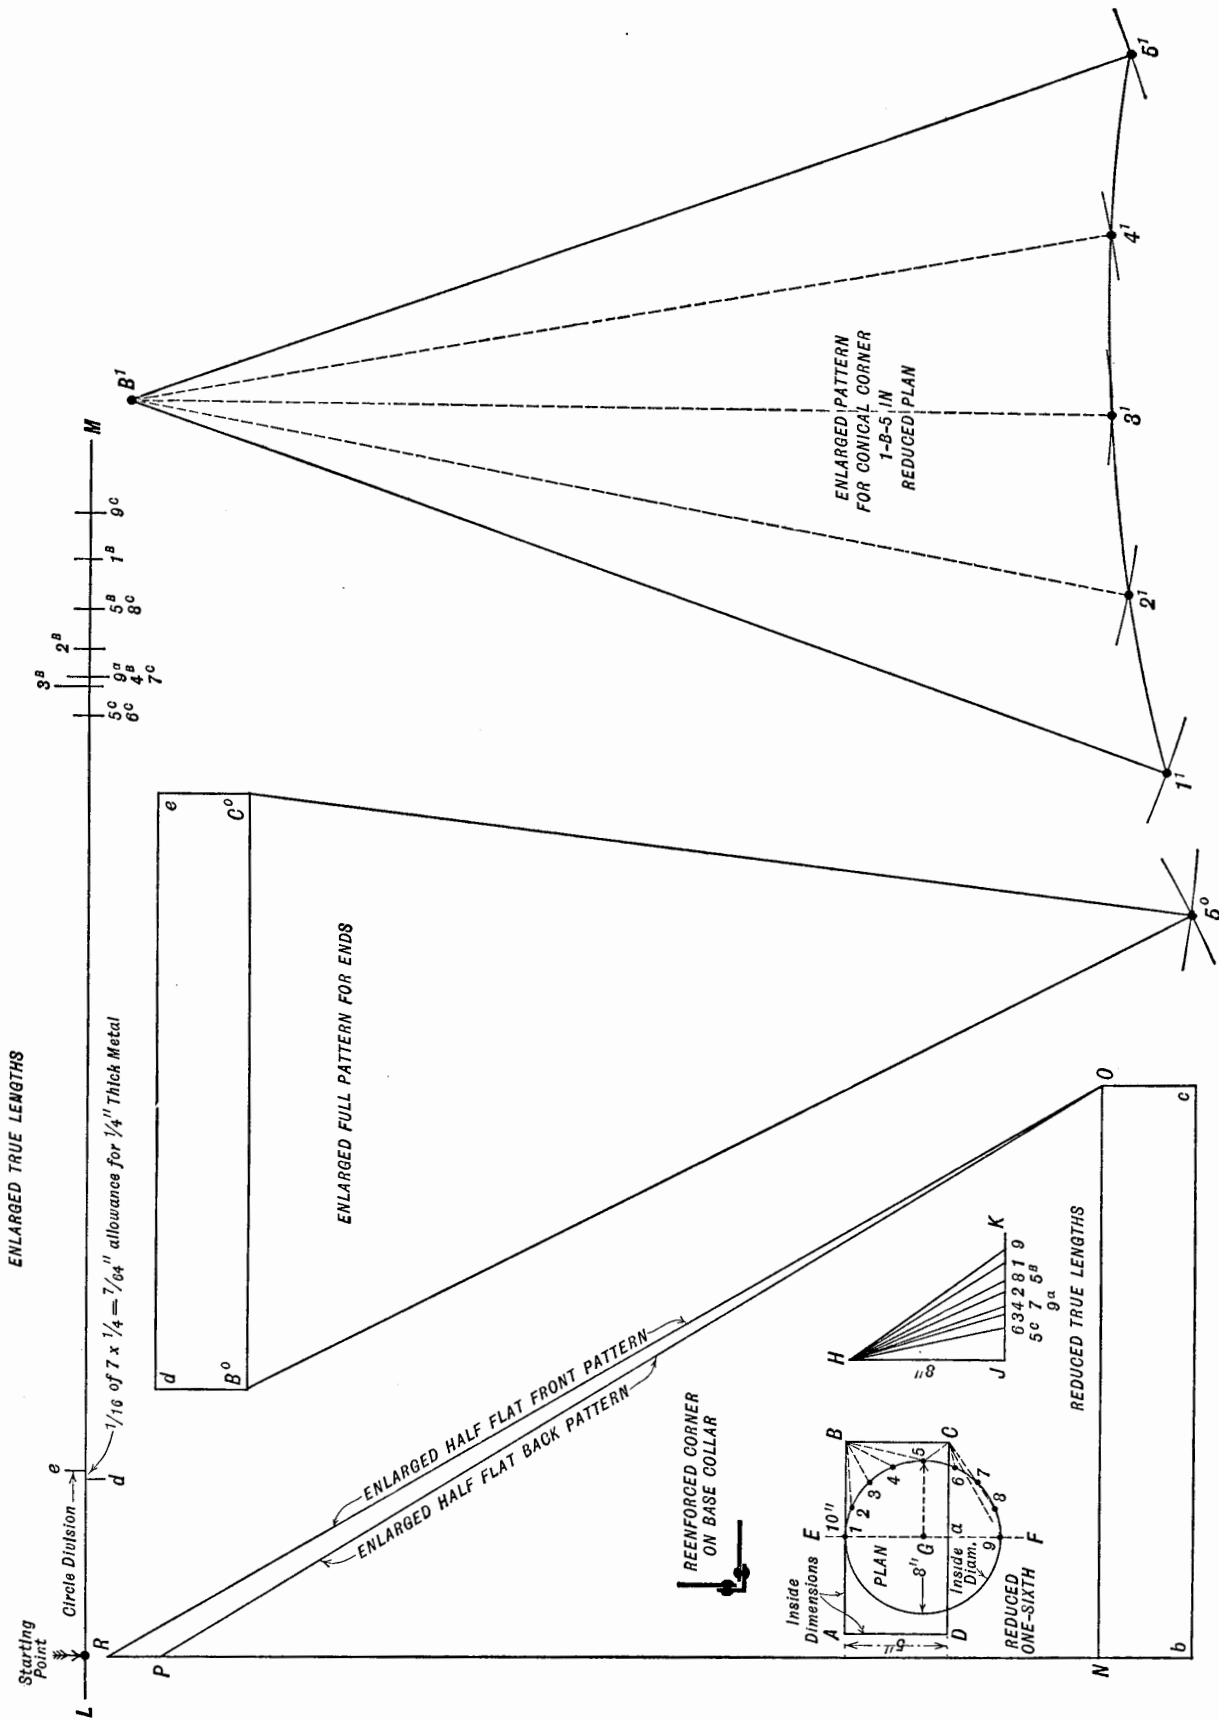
Development of Full Size Transition Piece from Reduced Drawings
